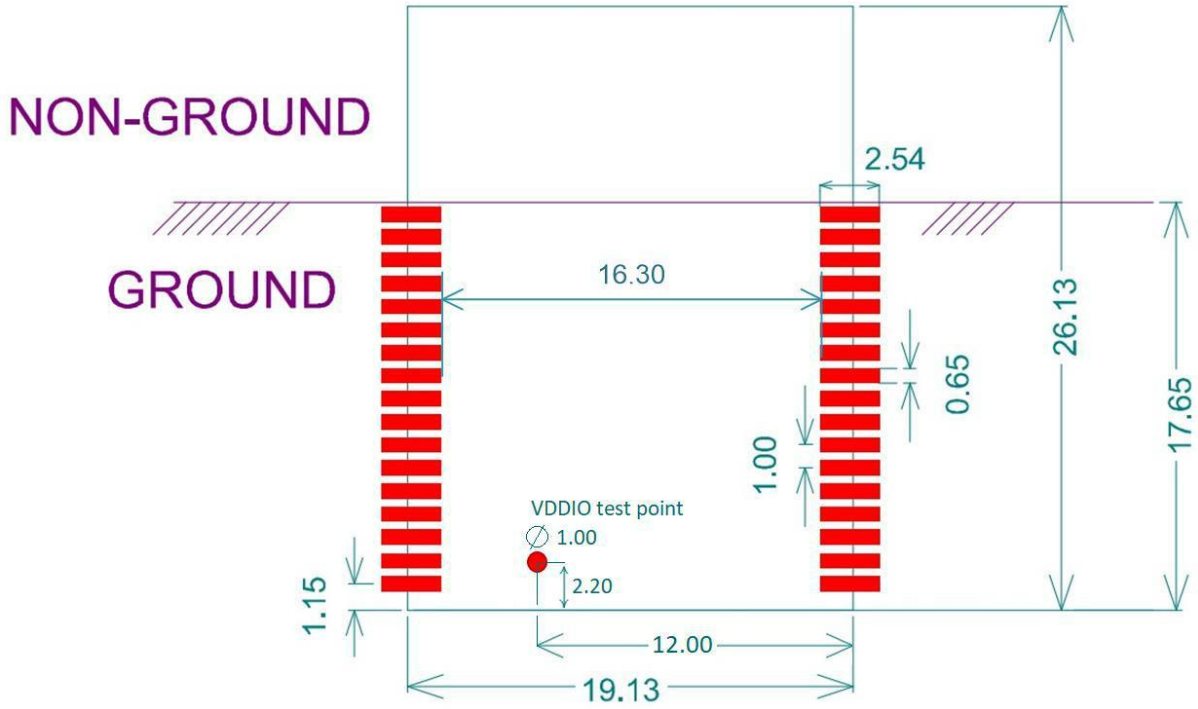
SKU609 Module Land Pattern (units: mm)
